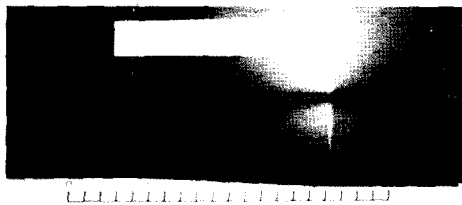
Photographs of weld seam tracking result (v :10mm/sec, offset :top and bottom 10°, right and left 10°)
